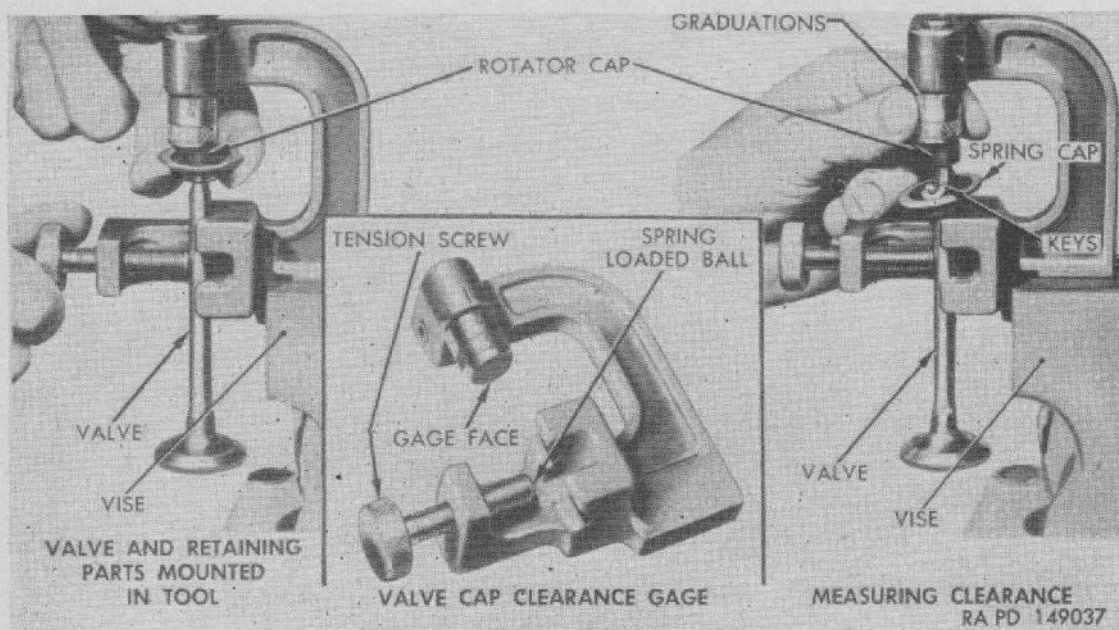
Checking rotator cap to valve stem clearance using gage 7950058.
